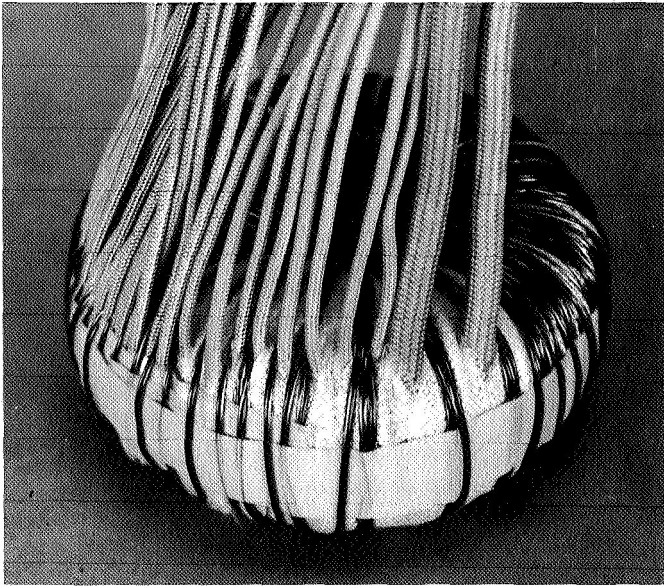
Toroidal transformer showing lead breakout with sleeving
